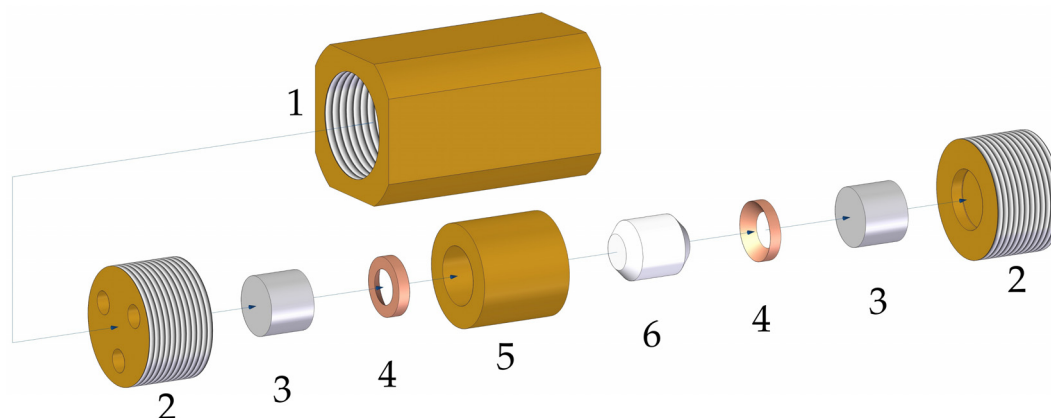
Exploded view of the TM-PCC: (1) body; (2) end-nut; (3) zirconia piston; (4) copper antiextrusion ring; (5) inner cylinder; (6) PTFE capsule. Please, note the inner cylinder (5) is inserted into the cell body (1) prior to assembling the other parts.
